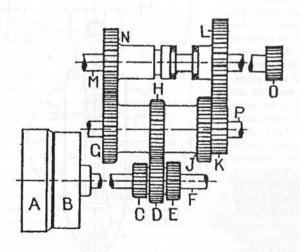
A six-speed Gearbox for Shaping Machine Drive.
